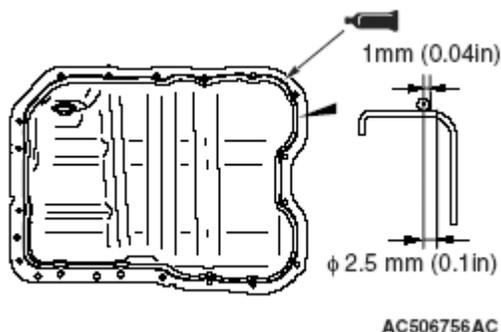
Applying Sealant Without Any Gap To Mating Surface Of Engine Oil Pan
